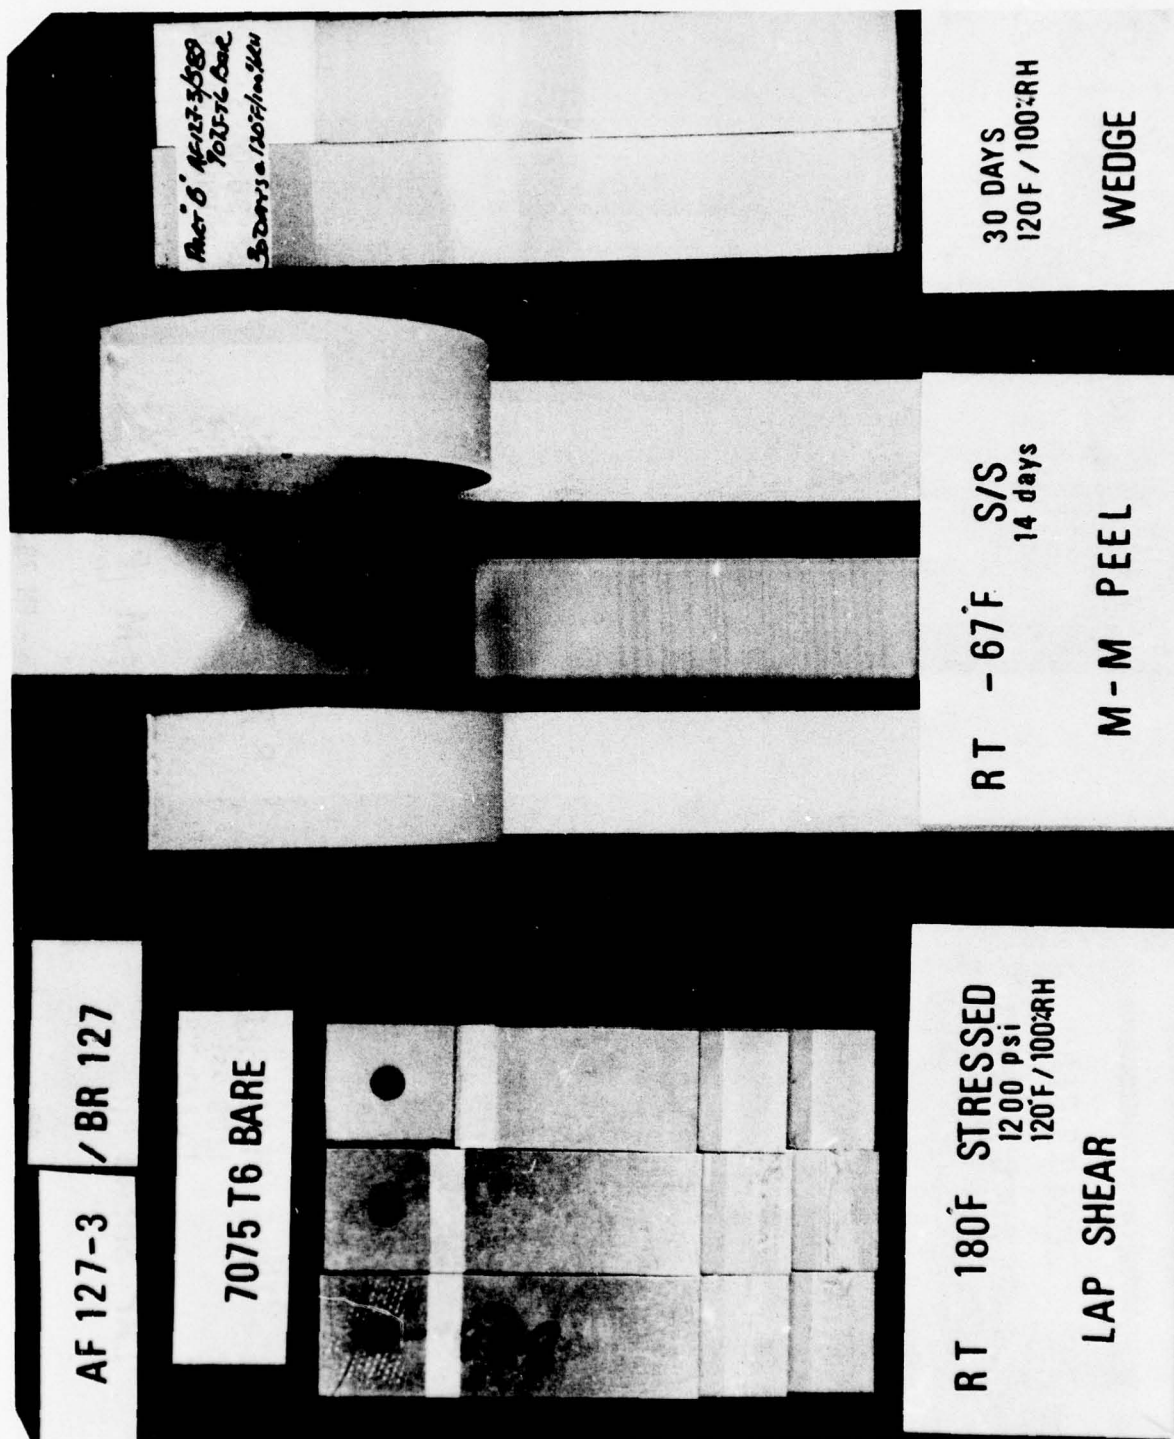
Specimen Bond Surfaces -- AF 127-3, 7075-T6 Bare
